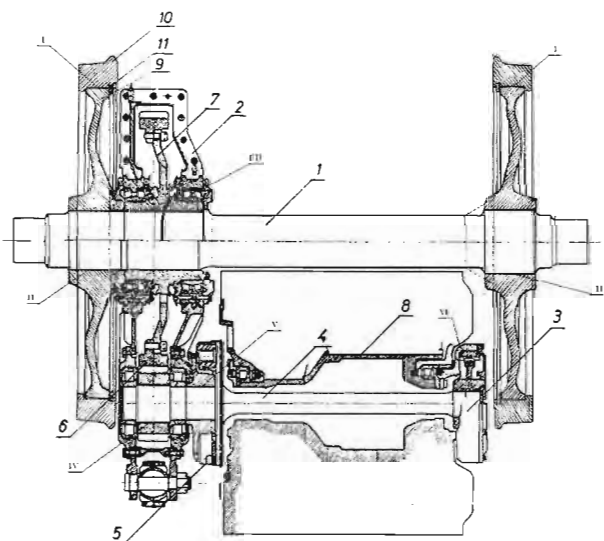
The electromotor-axle drive: 1, axle; 2, housing; 3, gear coupler; 4, torsion shaft; 5, elastic coupler; 6, small gear; 7, large gear; 8, rotor shaft; 9, wheel; 10, wheel flange; and 11, ring for flange fixture
